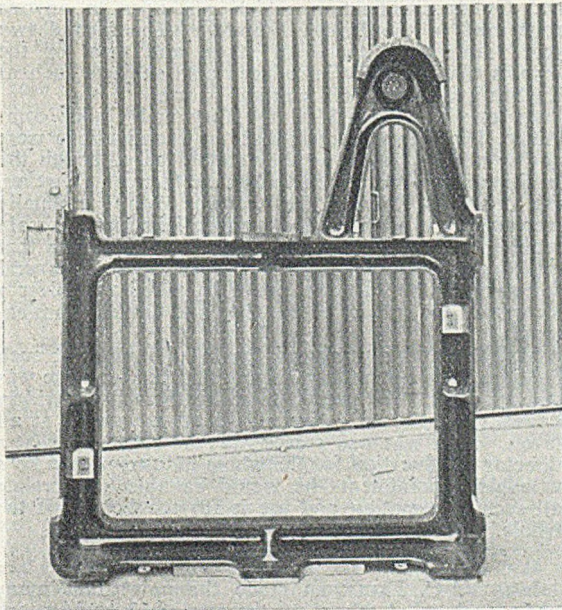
FRET-CUTTING MACHINE BASE PATTERN.
